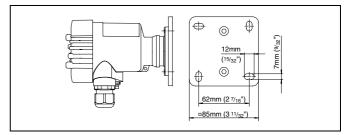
VEGADIS 61 for wall mounting, bottom view of mounting plate.
